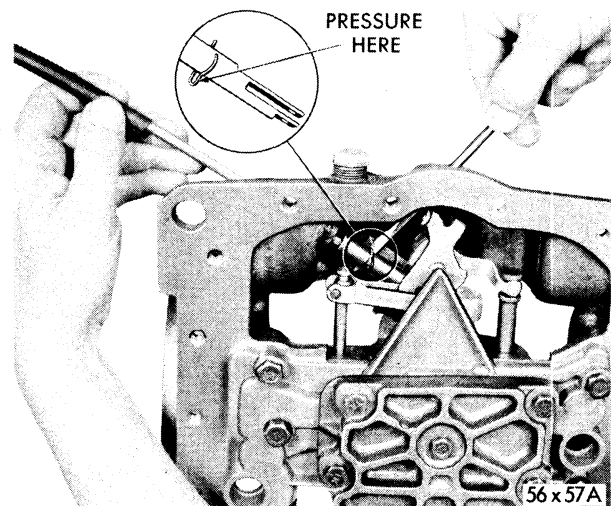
Removing Control Cable Assembly, Showing Early Design Lock Spring (Oil Pan Removed to Show Operation)
